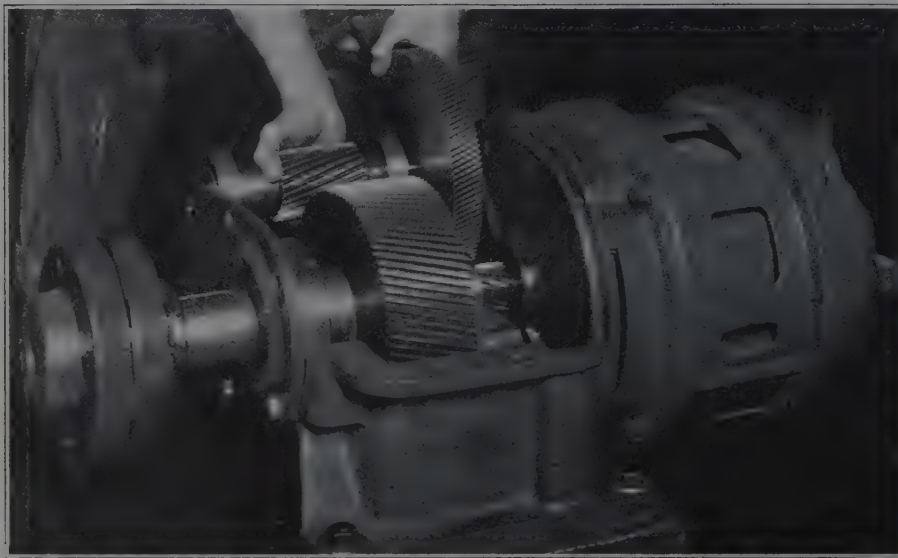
Casing of Gear Motor Removed Showing Four Gears
